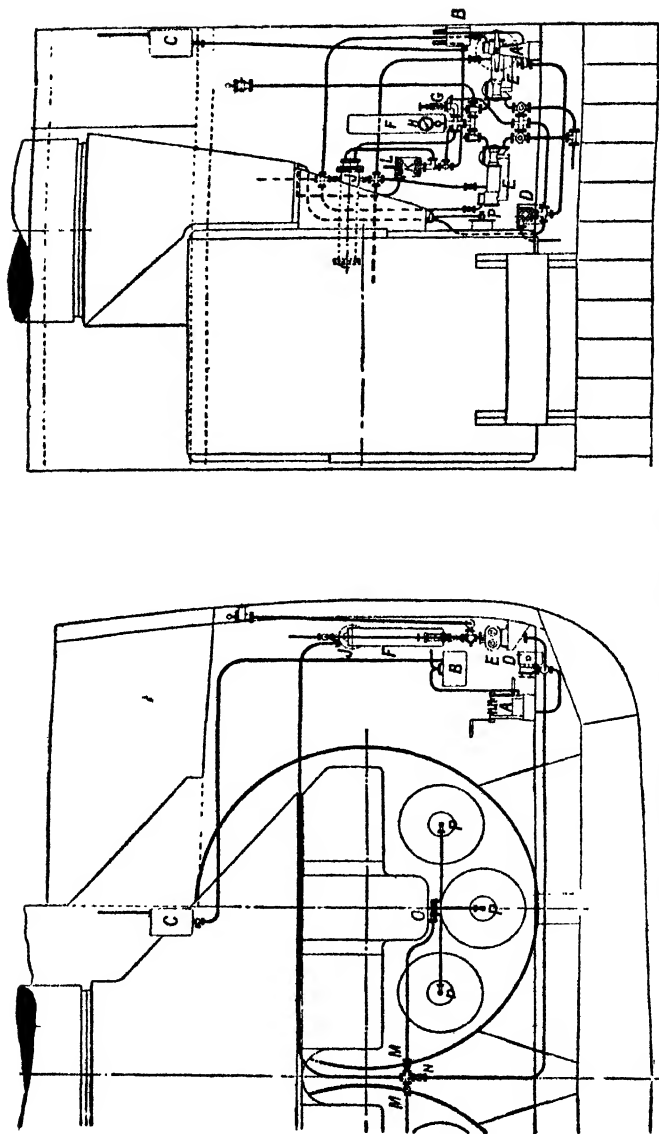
Arrangement of marine boilers fitted with Wallsend oil-burning apparatus.
